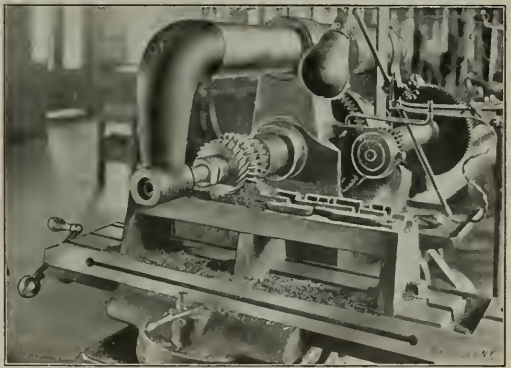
Using Gang of Cutters for Rapid Finishing by Milling.
